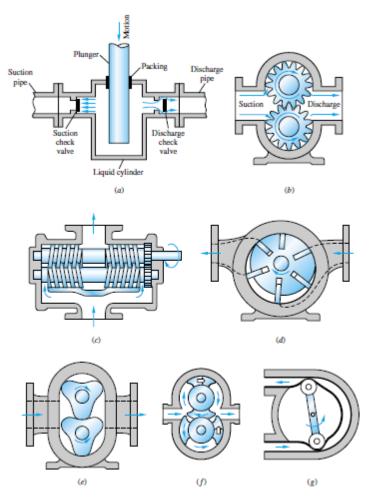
Schematic design of positive-displacement pumps: (a) reciprocating piston or plunger, (b) external gear pump, (c)double-screw pump, (d) sliding vane, (e) three lobe pump, (f) double circumferential piston, (g) flexible-tube squeegee.
